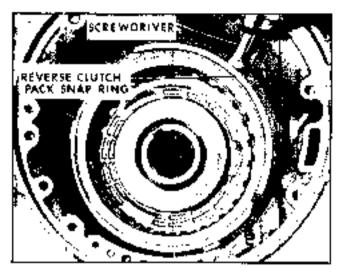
Removing Keverse Clutch Fack Spac King
